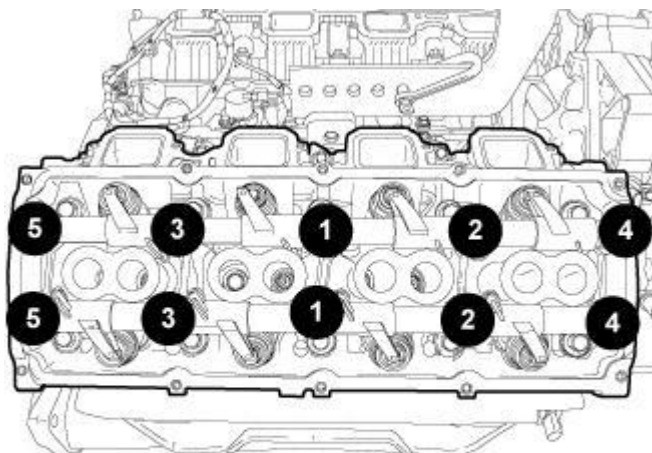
Cylinder Head Cover Gasket & Cylinder Head Cover
